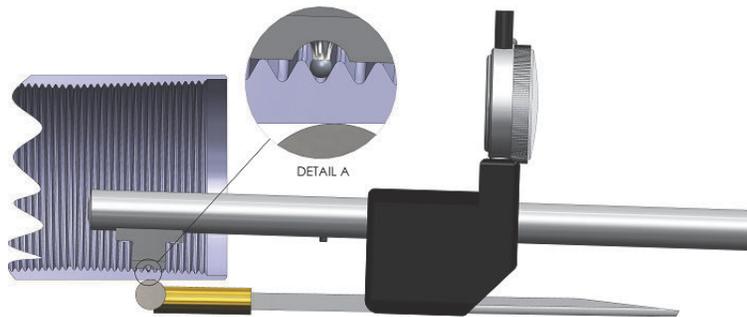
Internal Addendum Gauge on Coupling Threads (Round Thread Addendum Gauge)
